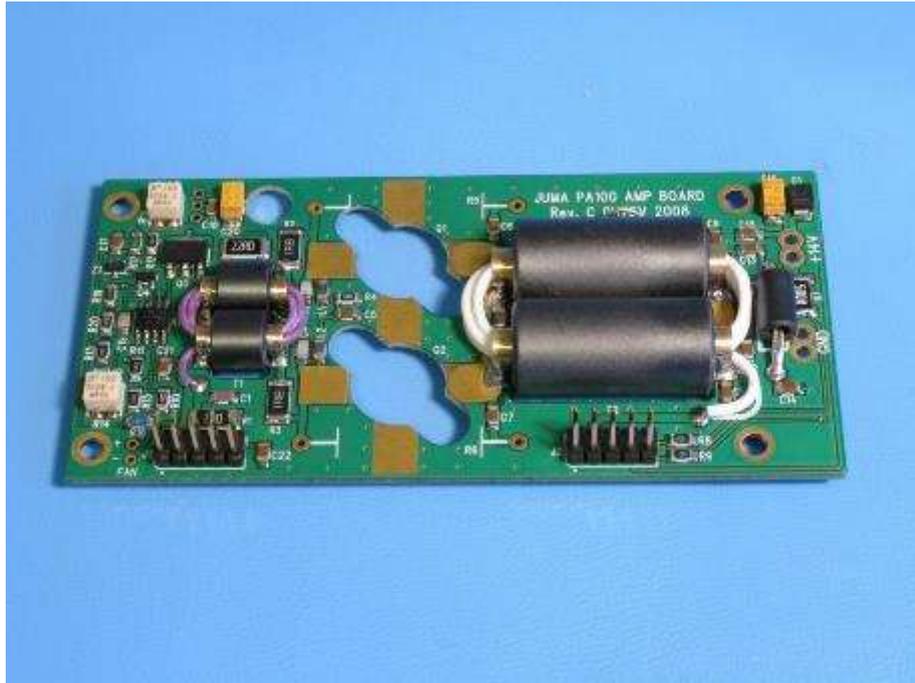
Solder L3 with two copper wires thru the ferrite bead. Solder also GND jumper near T2.
